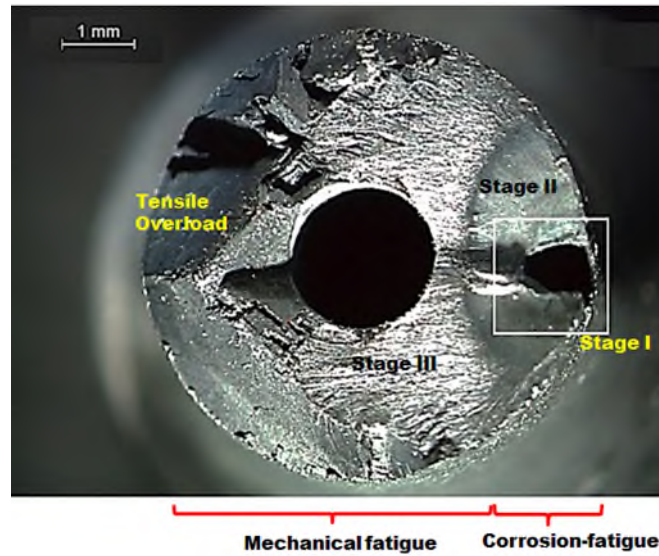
Example of a fracture surface of a tested fatigue specimen (LD 17).
